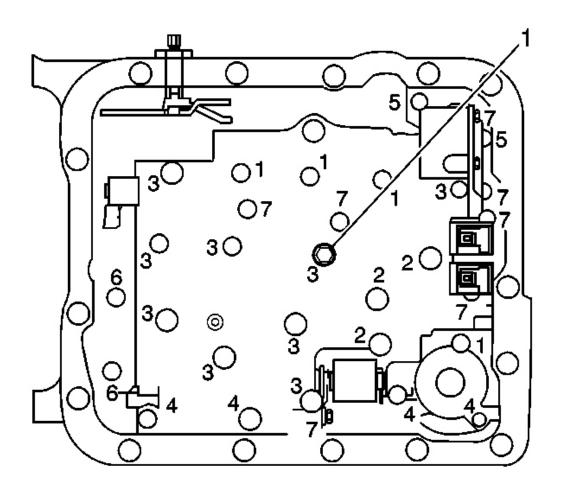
Locating Bolt In Center Of Valve Body Courtesy of GENERAL MOTORS CORP.
